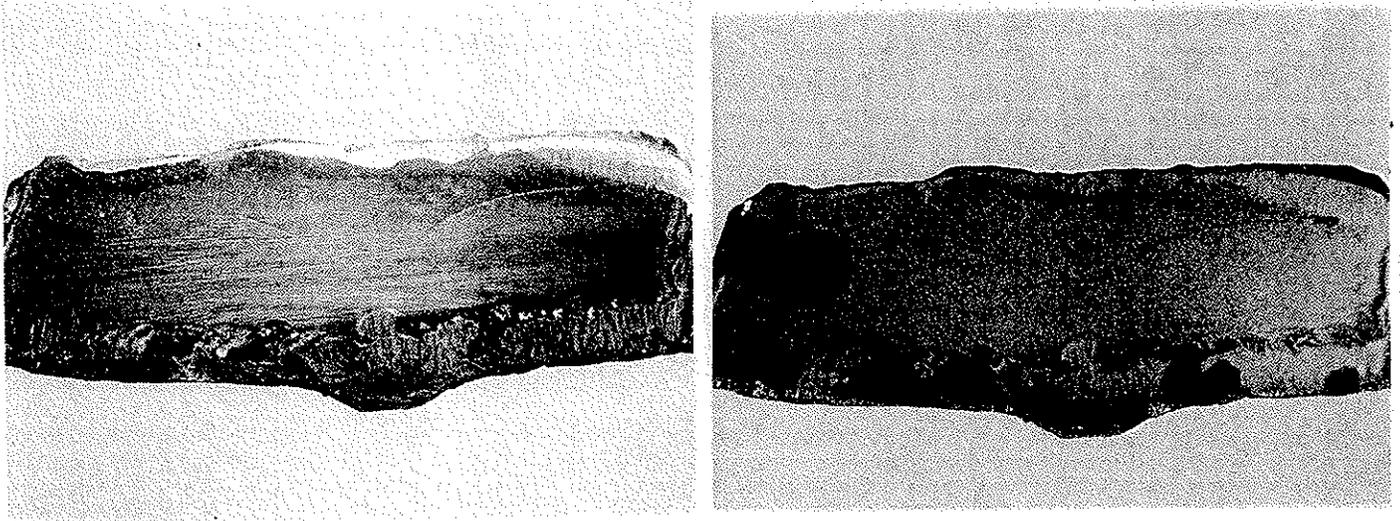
Photographs of ID of vacuum bottoms line showing cracks on cleaned metal surface (left) and penetrant inspected surface (right). Weld in line is at bottom of picture. Dye check did not reveal all cracks, indicating that cracks are tight and/or filled with vacuum resid.
